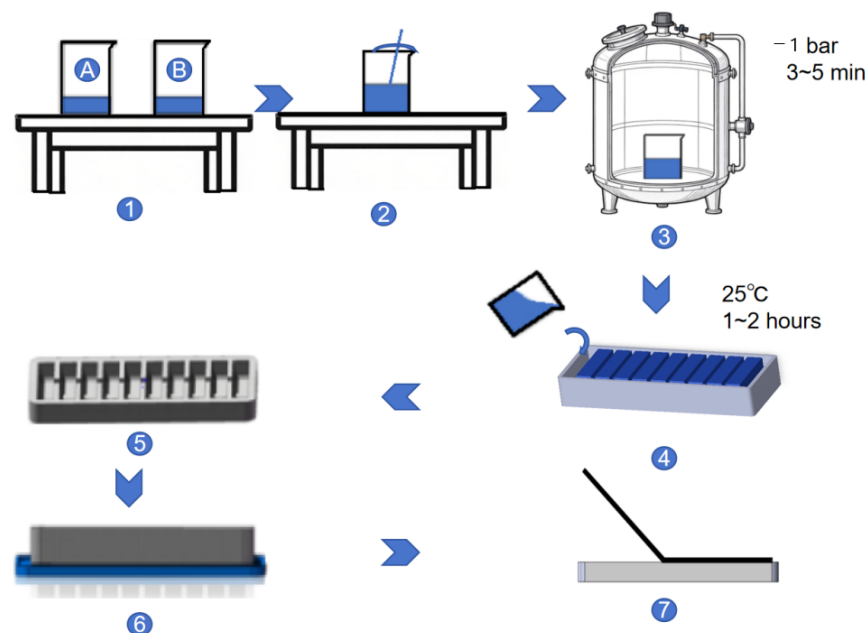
The classical pneumatic actuator fabrication process: the fabrication overview: (1) silicone preparation; (2) mixing and stirring; (3) degassing in a vacuum chamber; (4) silicone pouring; (5) curing and demolding; (6) bottom sealing; (7) carbon fiber woven mesh assembly. A and B represent the silicone base and curing agent, respectively.
